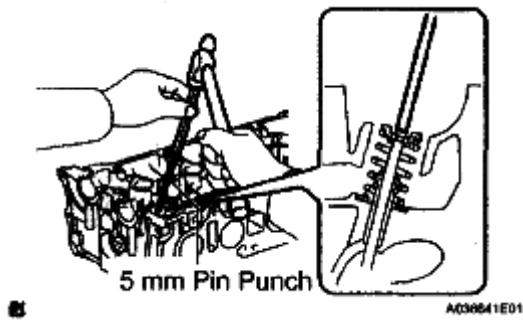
Tapping Valve Stem Tip To Ensure Proper Fit
